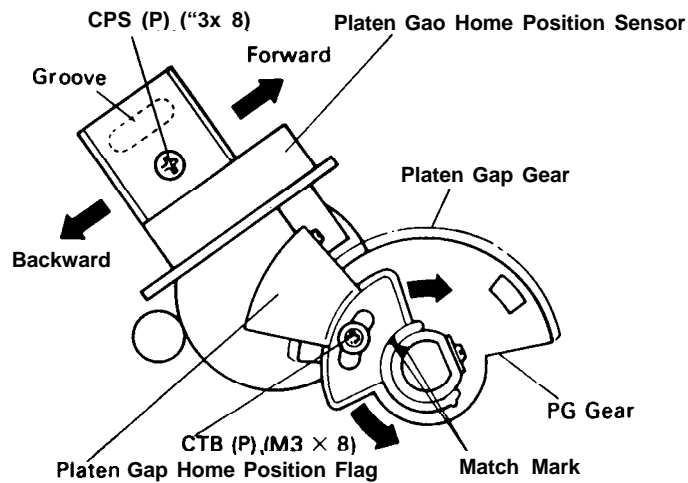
Platen Gap Gear Mounting Position Adjustment
